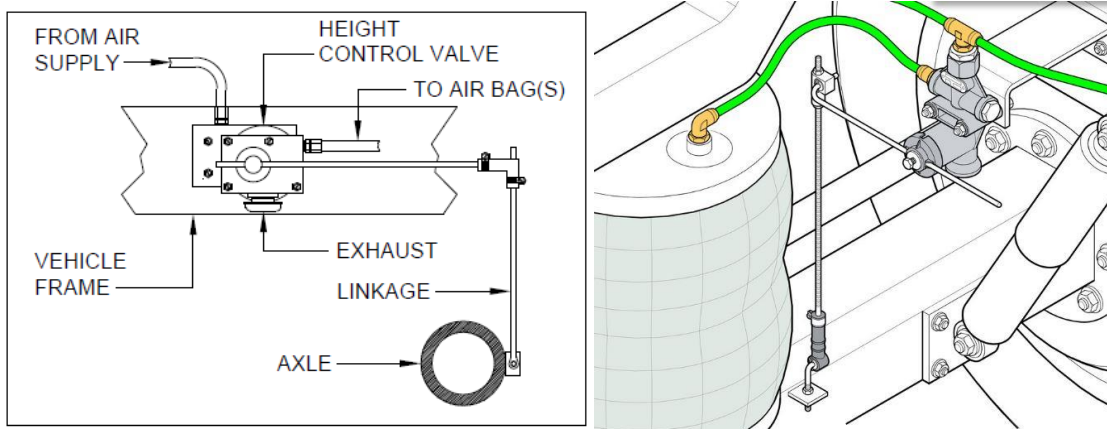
Typical height control valve mounting and connection to axle [22]
